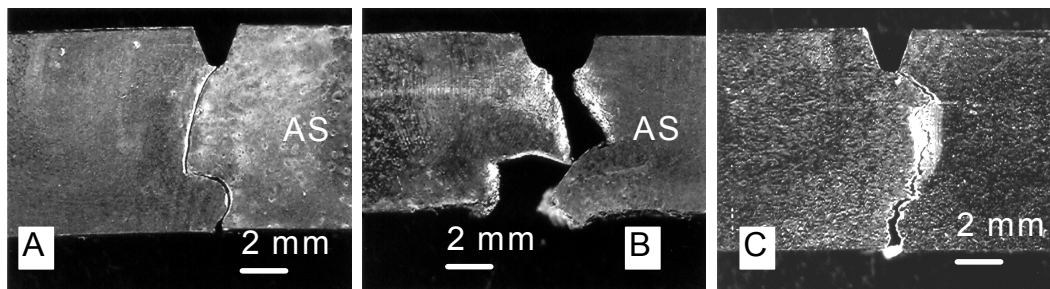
Fracture paths through the weld cross section (A), (B) weld exposed for 1 minute at 800 °C, (C) parent metal exposed to liquid nitrogen. AS: advancing side of the weld.
